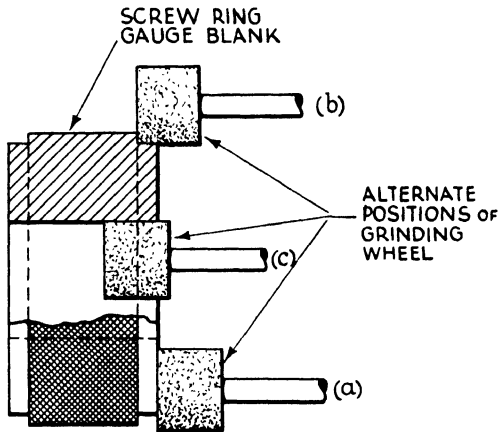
PRELIMINARY STEPS IN GRINDING A SCREW RING GAUGE
